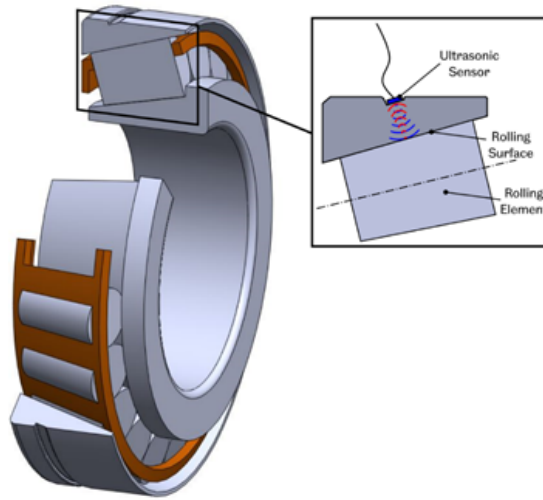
Illustration of the channel machined in the bearing for ultrasonic instrumentation.
